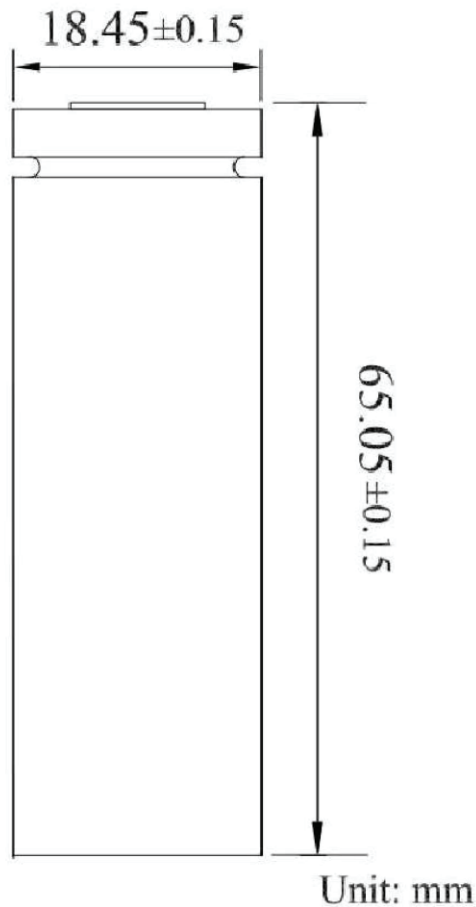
Outline Dimensions of ICR18650-3500 mAh (with Tube)
